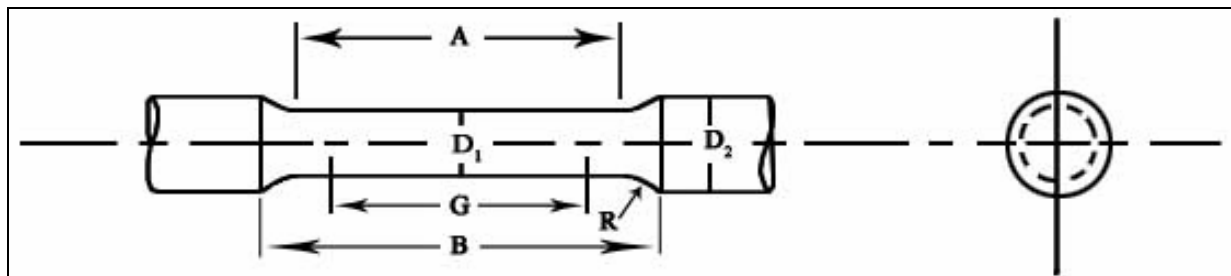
A typical cylindrical tensile sample: A is the gauge section, G is the gauge length, D1 is the gauge diameter; An example of the dimensions D1, D2, B and R for the above tensile sample as per ASTM standard A-370 is: A = 20 mm, B = 28 mm, D1 = 4 mm, D2 = 8 mm and R = 4 mm
